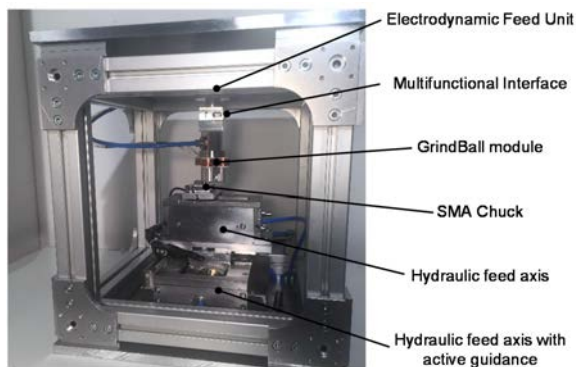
Modular machine tool with hydraulic feed axes for grinding operations cf. [5]
